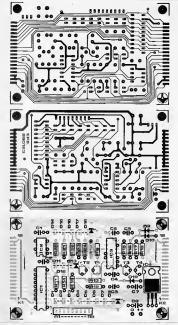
Track leyout and component mounting plan. A number of perts must be soldered at both sides of the printed-circuit board.
